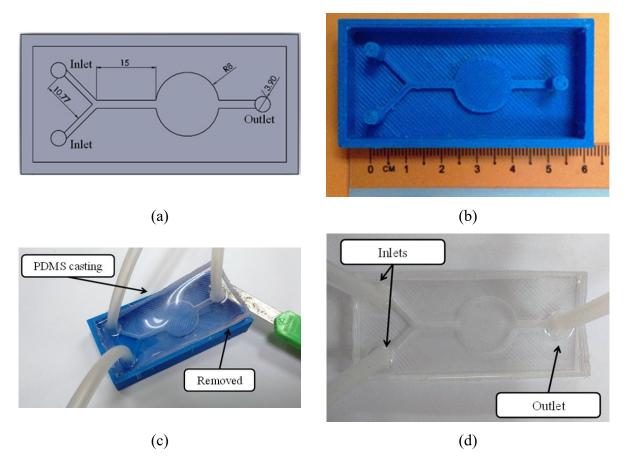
Sensing chamber fabrication (a) CAD drawing (b) 3D printing master template (c) cured PDMS casting (d) fabricated PDMS channel and chamber
